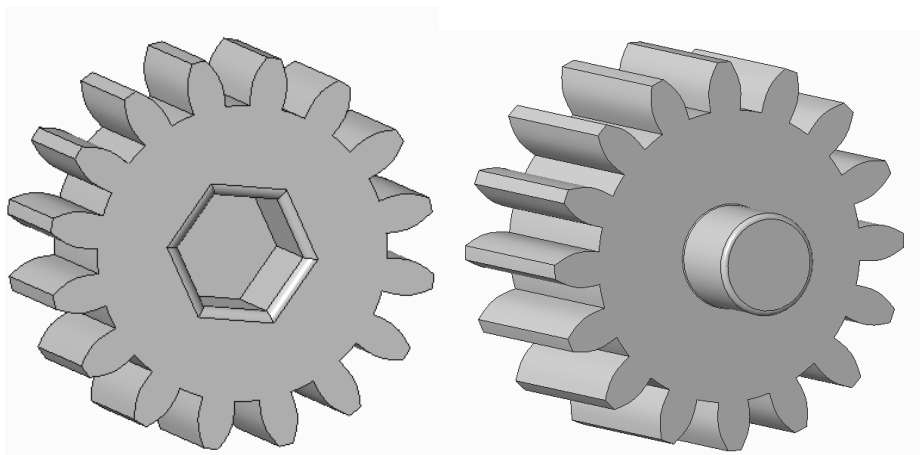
Output gear with cavity for nut and axle on both side to carry itself
